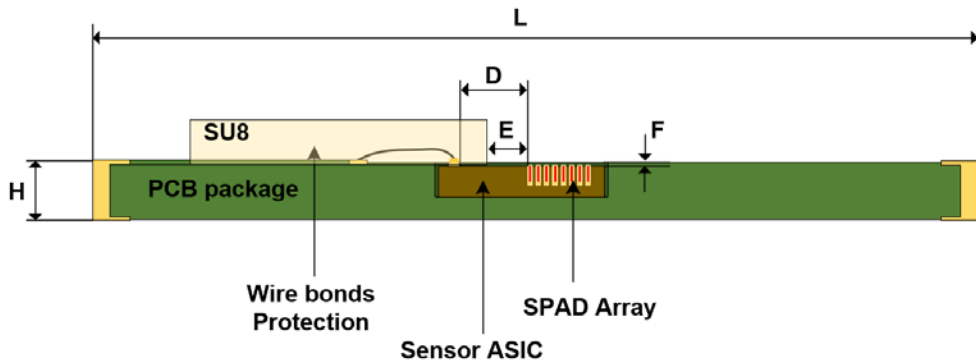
Cross-section diagram of the packaged SPAD sensor chip geometry.
